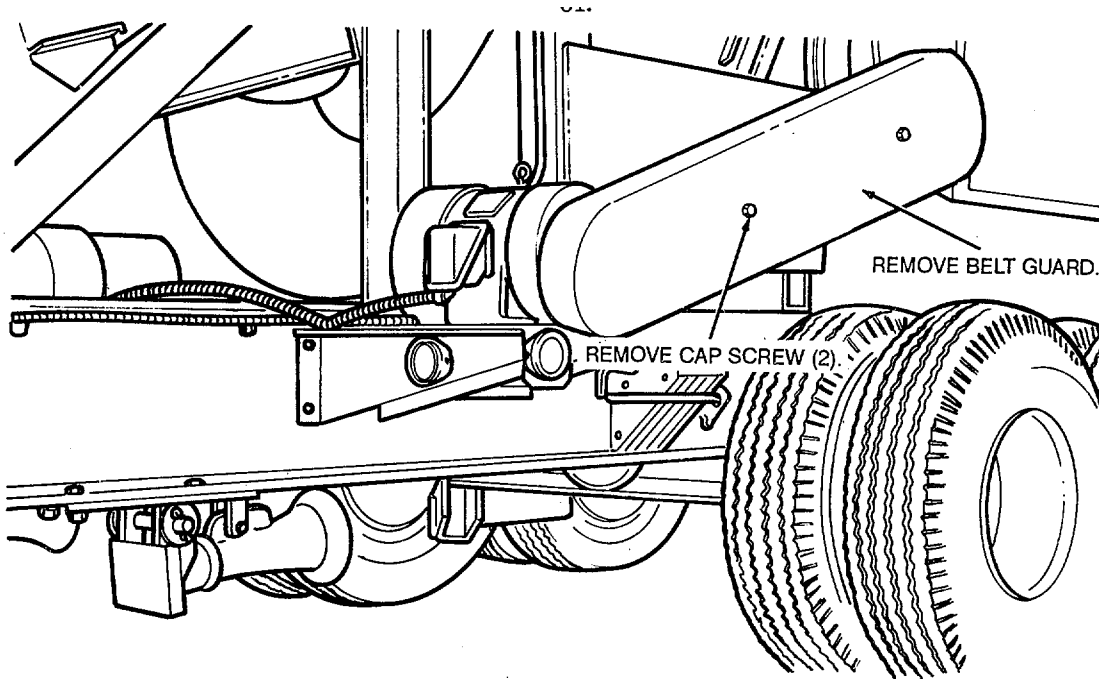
Return (under) conveyor drive belt guard, removal and installation
